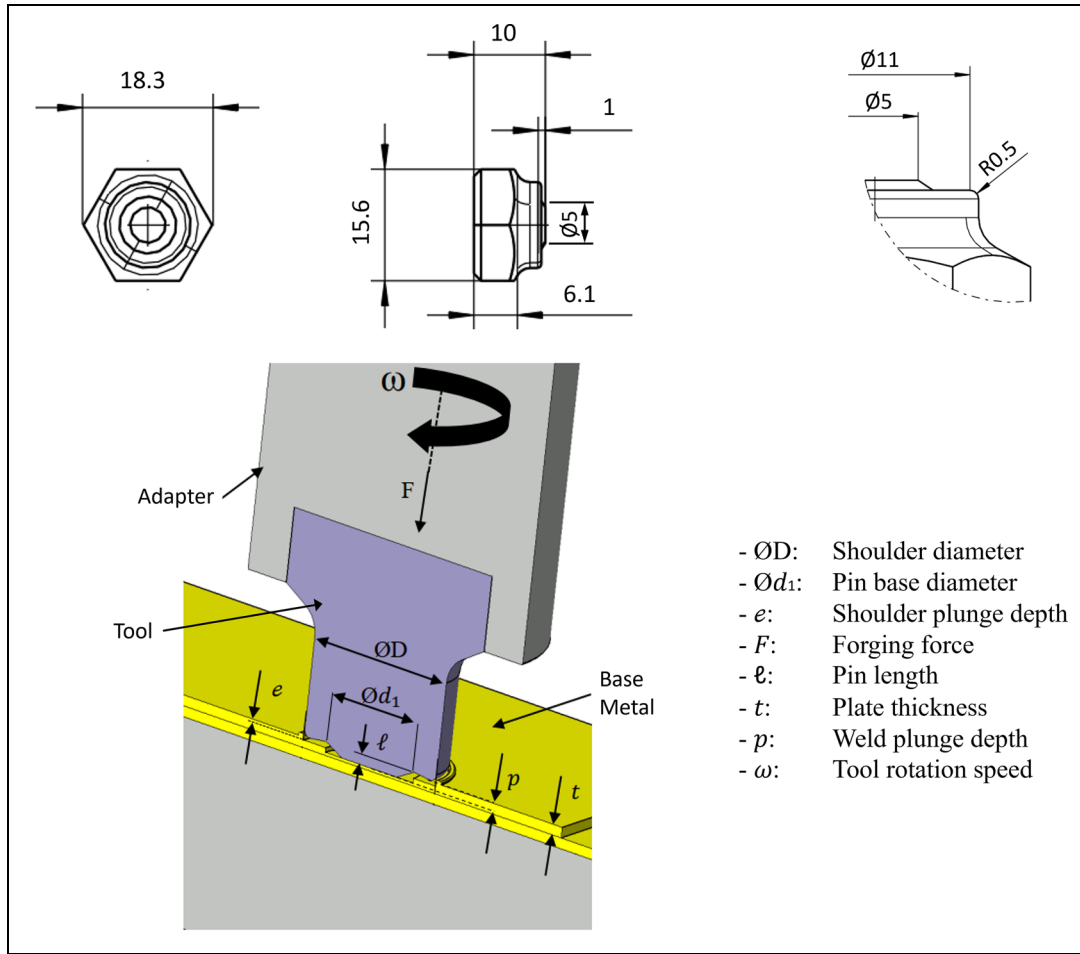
Schematic friction stir spot welding (FSSW) tool geometry.
